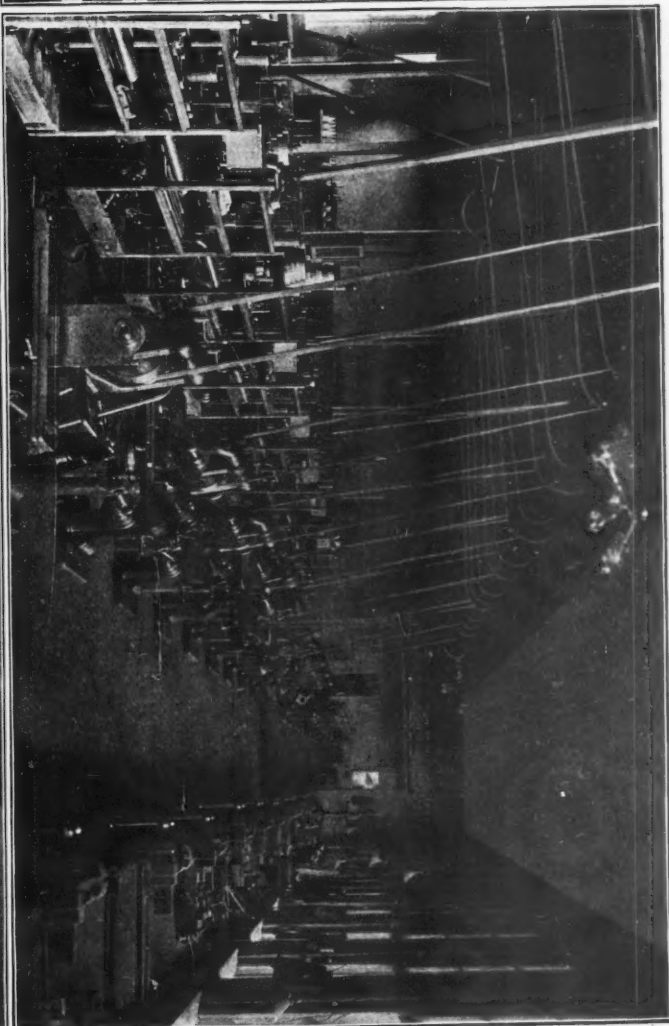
Assembling Department, showing trucks for holding parts of Machines.
